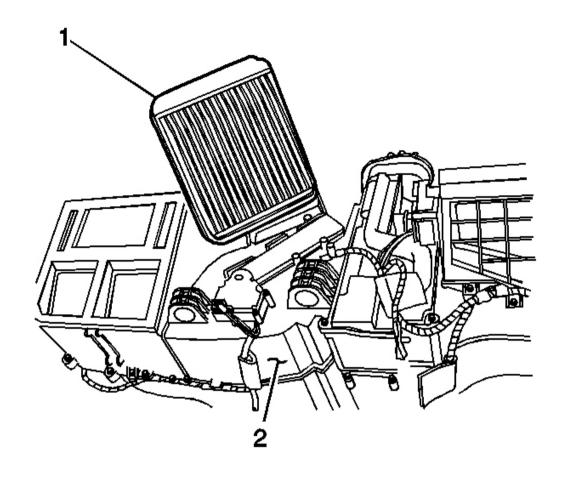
Heater Core Courtesy of GENERAL MOTORS CORP.
